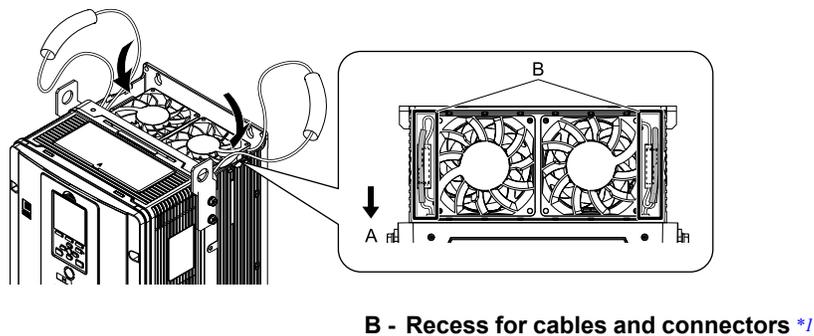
Put the Cables and Connectors in the Drive Recess
